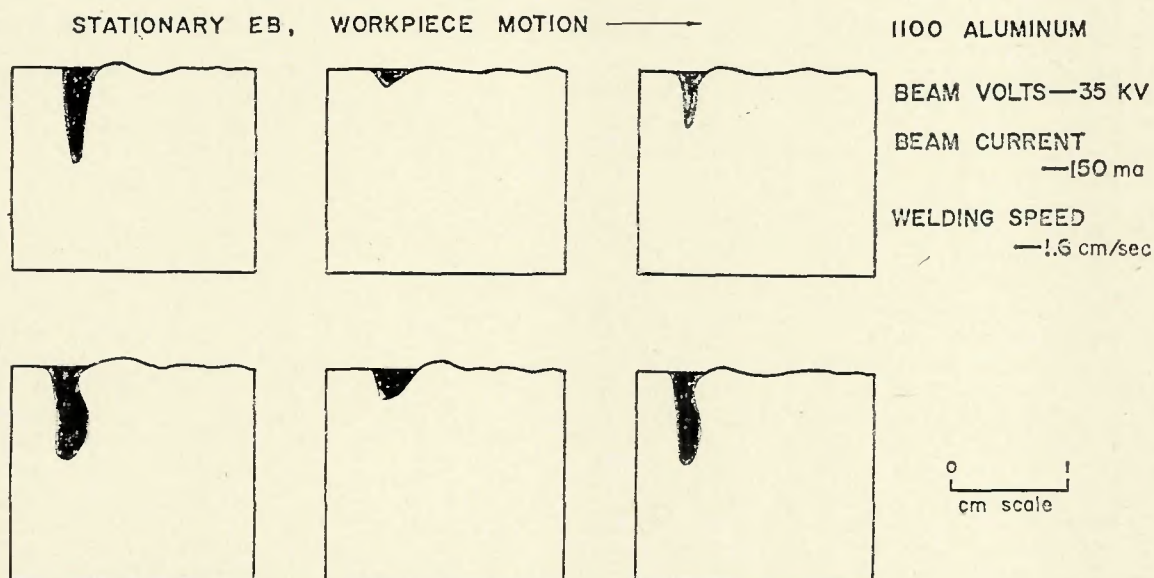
Reproduction of radiographs of electron beam welding cavity in aluminum
